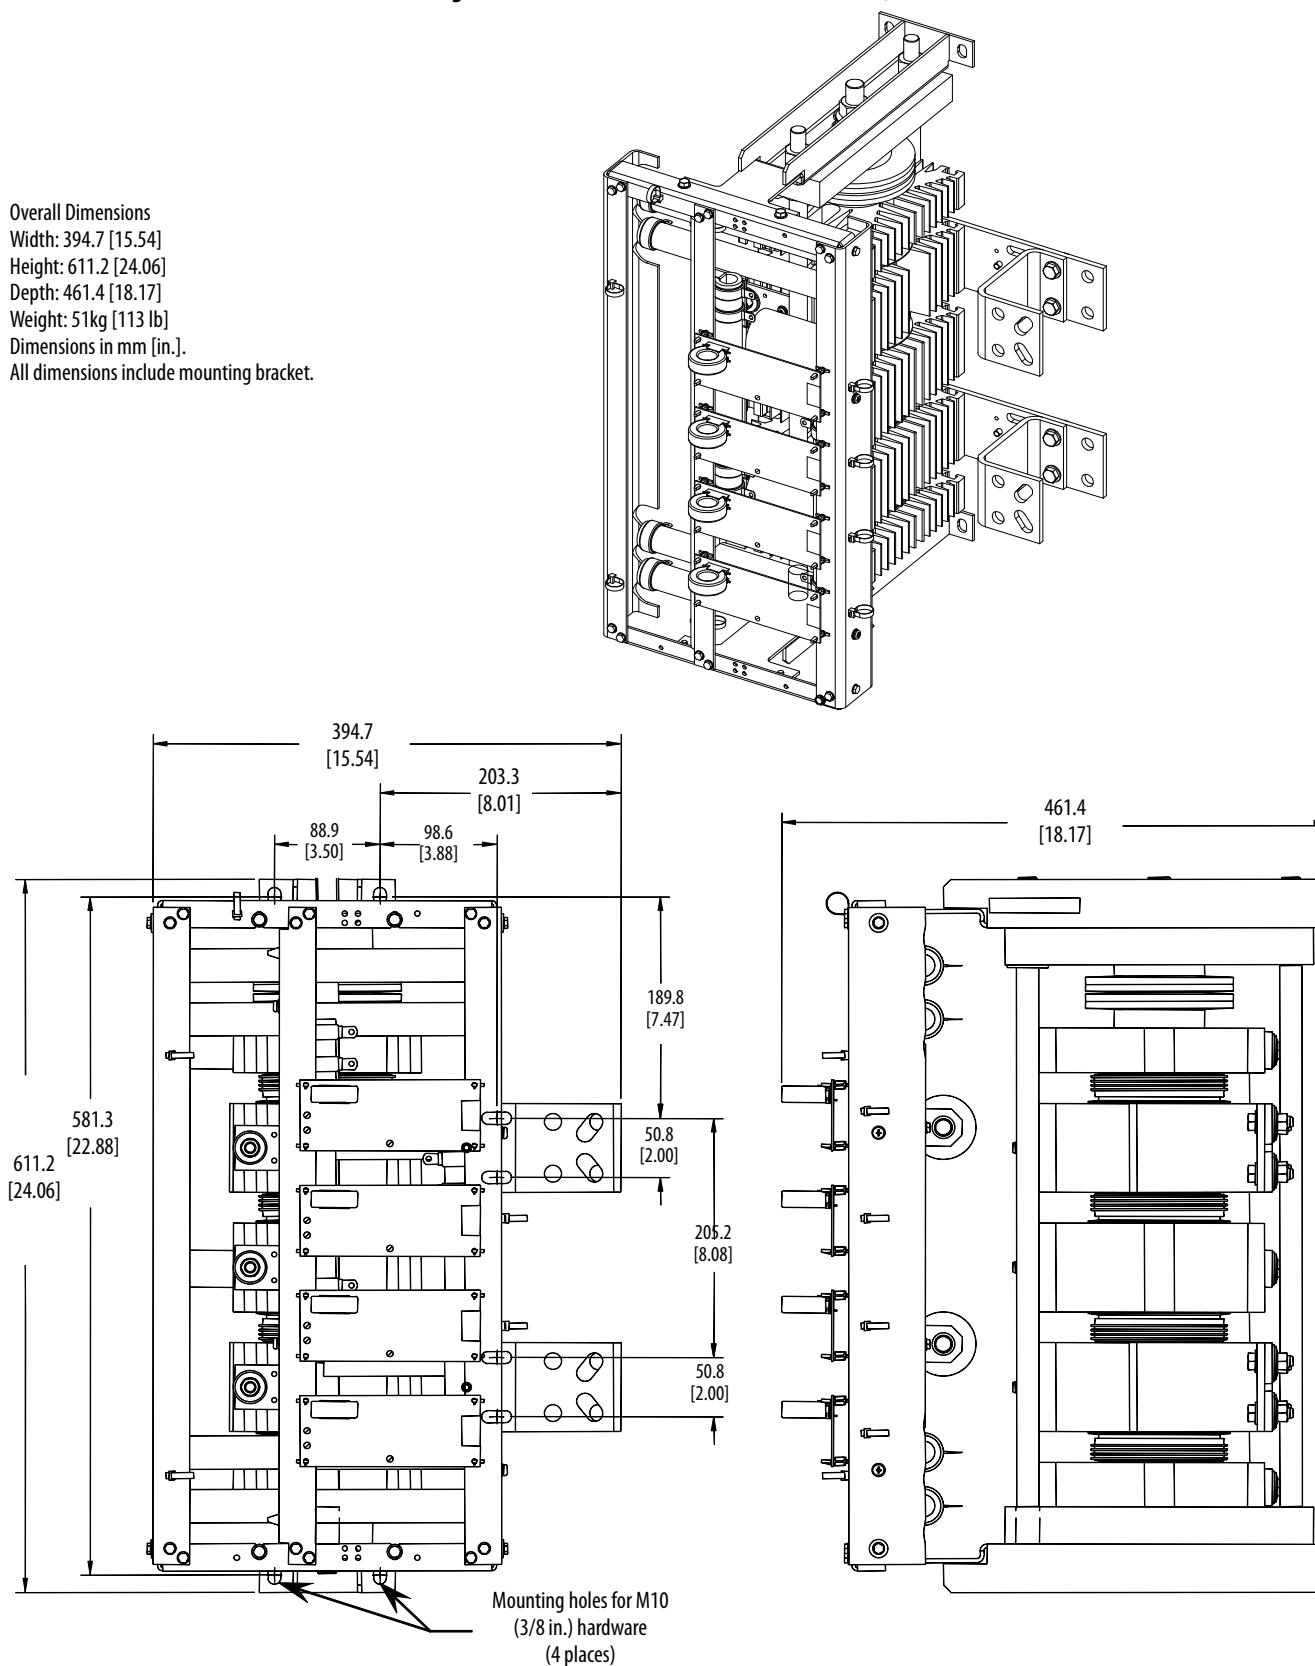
Power Stack Dimensions - 6900V, 180/360A
